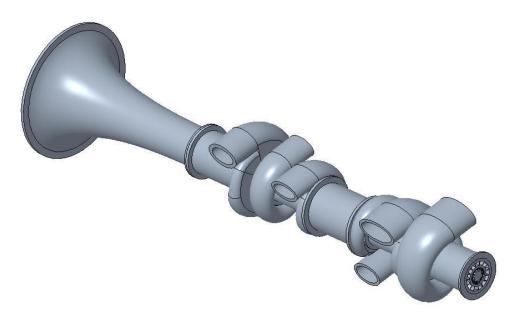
THE FINAL TURBOCHARGER ASSEMBLY
